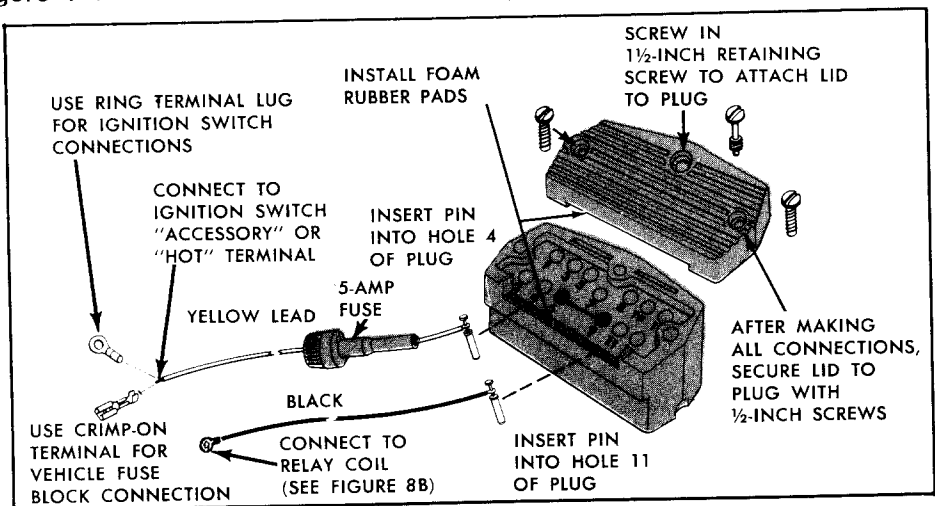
Connections for 6- or 28-Volt Ignition Switch Cables
